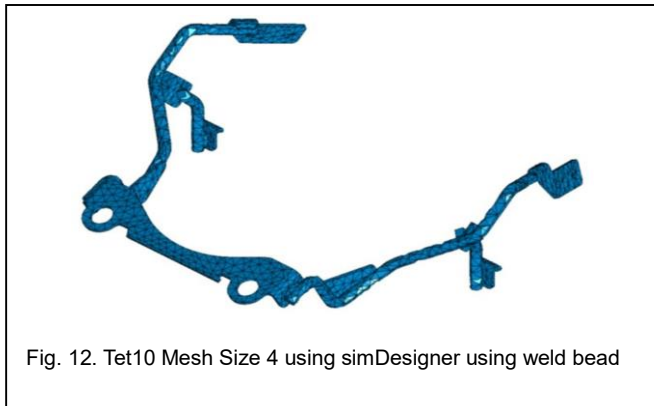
Tet10 Mesh Size 4 using simDesigner using weld bead
